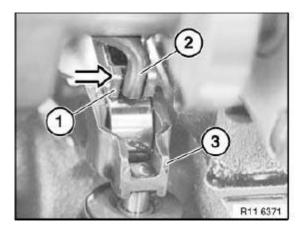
Identifying Torsion Spring, Intermediate Lever And Cam Follower Courtesy of BMW OF NORTH AMERICA, INC.
